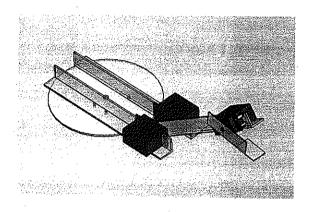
Gripper arm and wrist design drawing in Solid Works
